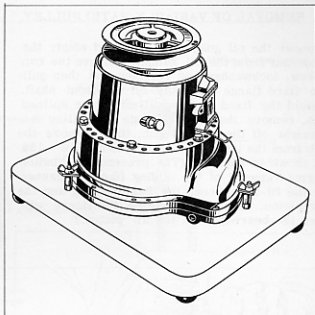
ASSEMBLY AND DISASSEMBLY JIG
